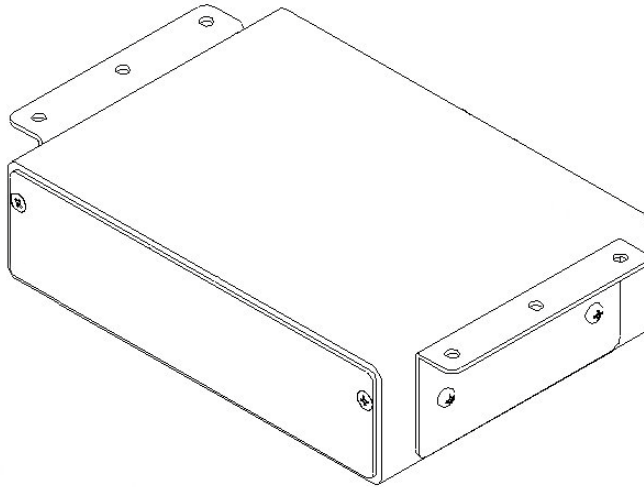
AVX-400 Presentation Switcher with Optional Mounting Brackets.
